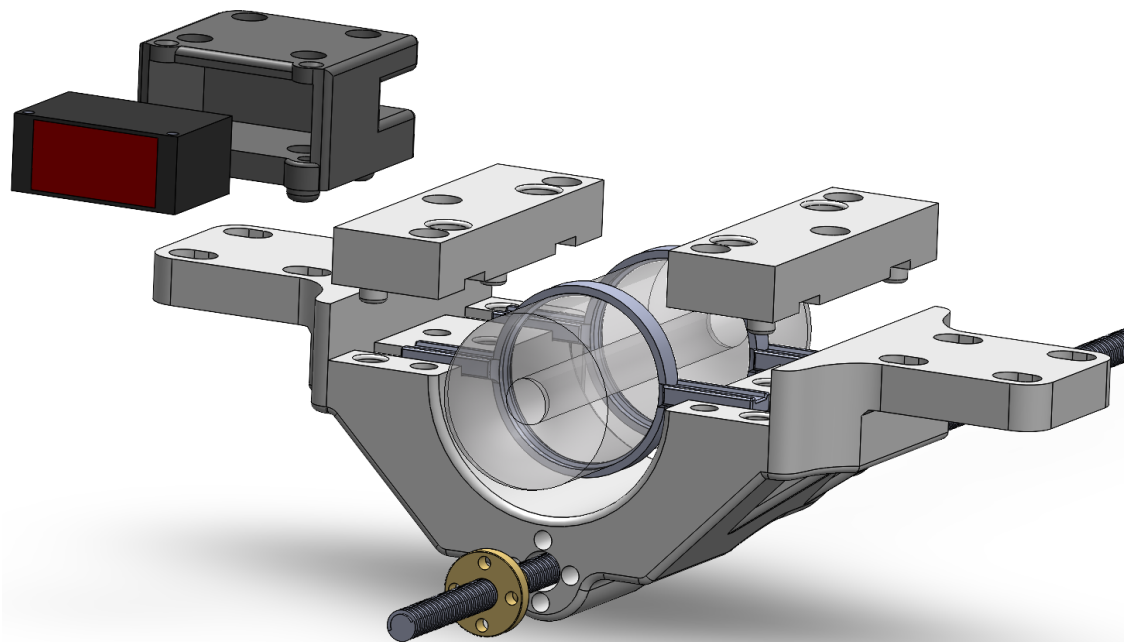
Exploded view of the hydrostat carrier, showing the hydrostat secured with o-ring shaped compliant clamps tightened with blocks. The laser is additionally mounted on the carrier.
